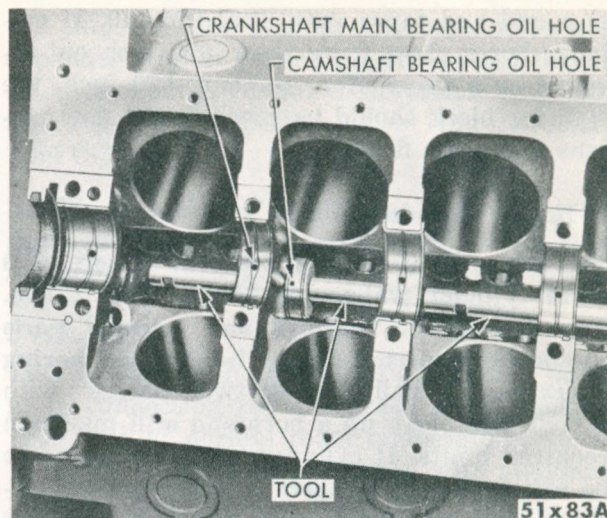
Installing Camshaft Bearing Shells Using Tool C-3034
